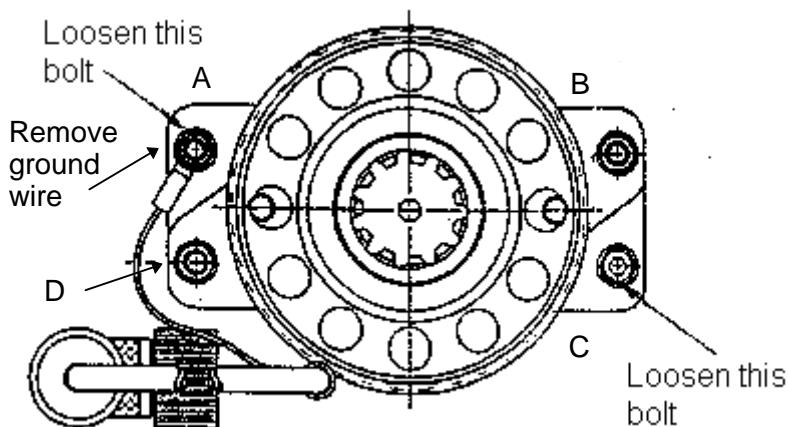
Powered Bolt - Top View (with Actuator Removed).
